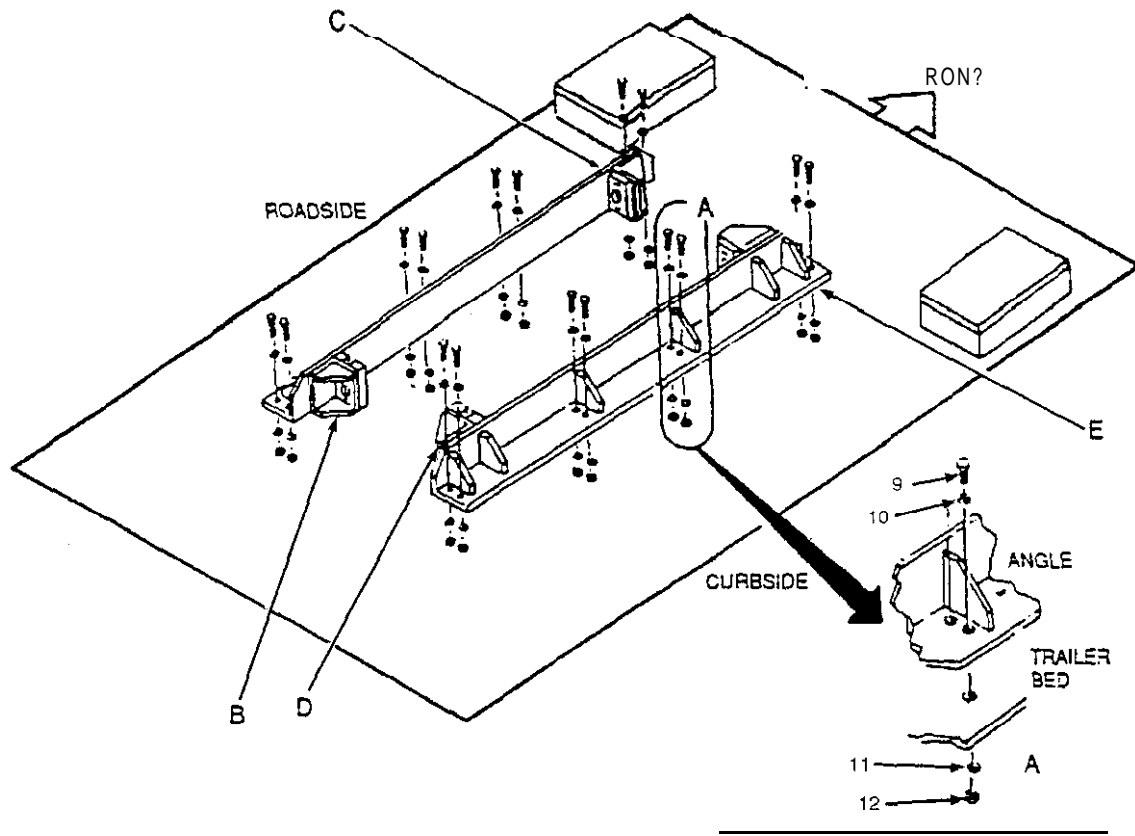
Hold Down Assembly (Sheet 2 of 2)
